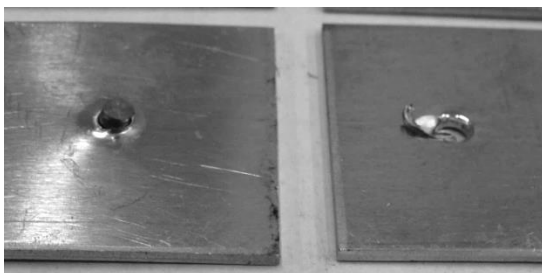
SSPR joints of the aluminium alloy sheets after the laps separation
